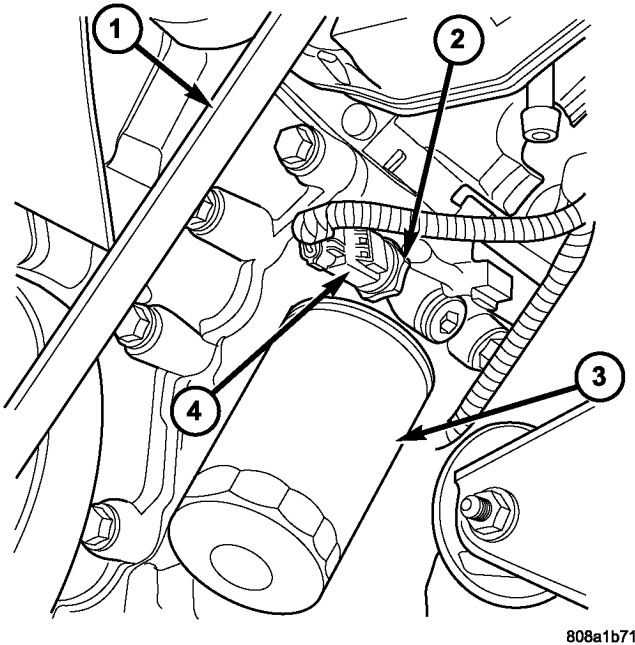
OIL PRESSURE SENDING UNIT -TYPICAL
